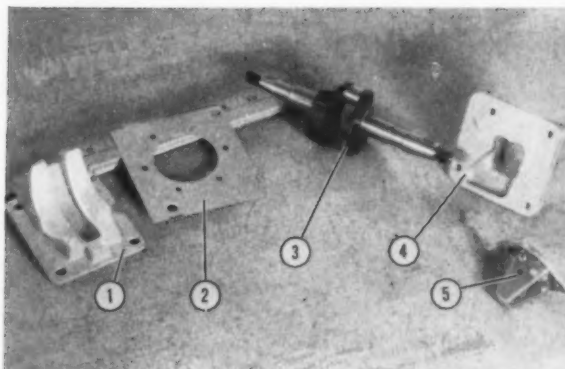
Engine hop-up parts: 1—crankcase bottom with over-size stuffer. 2—thin cylinder head gasket. 3—stroker-type crankshaft. 4—special intake manifold. 5—special pyramid-type reed valve assembly.
